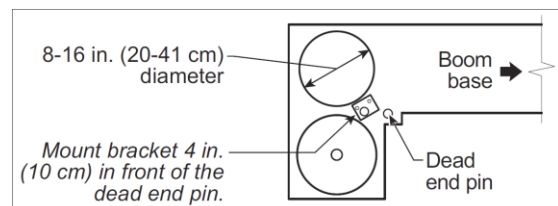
Anti-two-block switch placement for dead end mounting on a lattice boom
